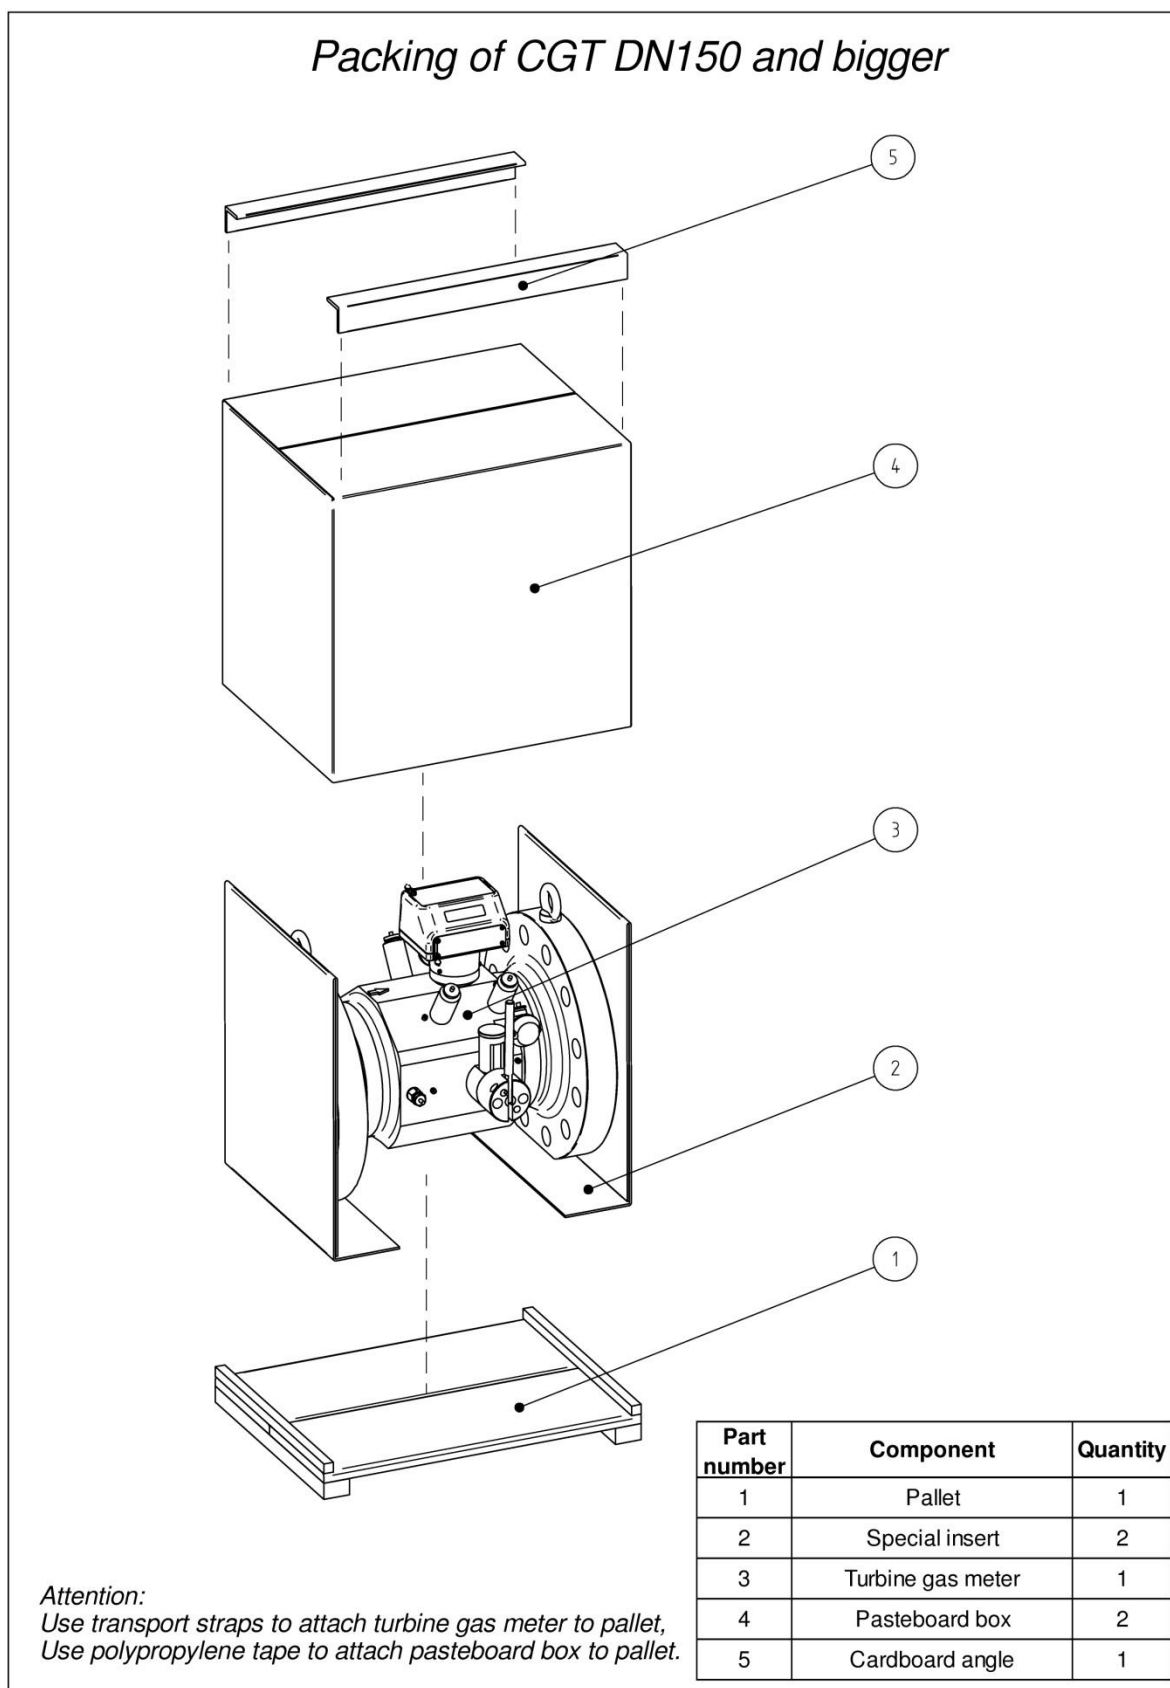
Packaging of DN150÷DN400 turbine gas meters
